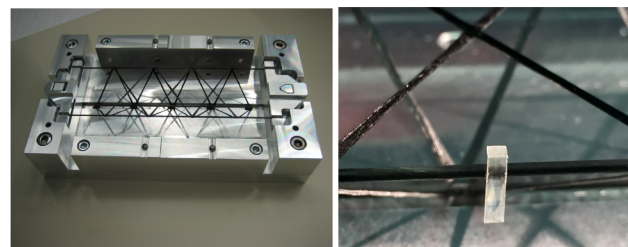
The CF-ladder is placed into the mounting fixture (left). One L-Leg is glued with the tool onto the CF-ladder (right).
